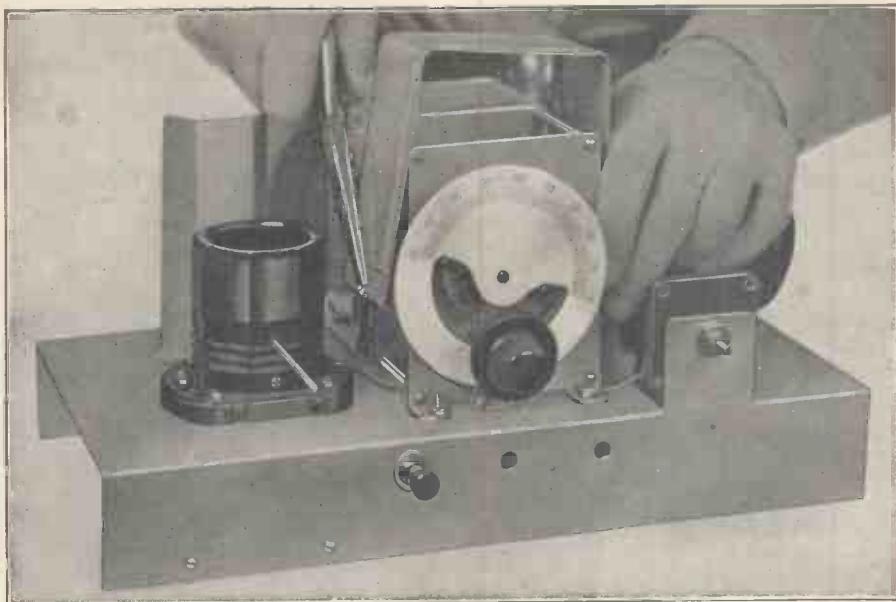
The condenser covers clip to the frame of the condensers. Spring them apart and lift them for removal.
